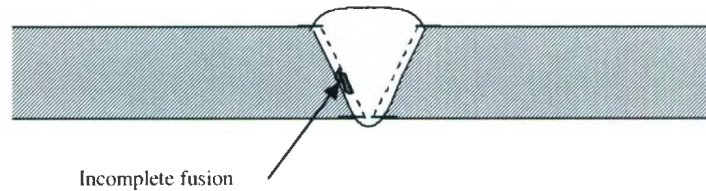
Incomplete fusion in a welding joint
